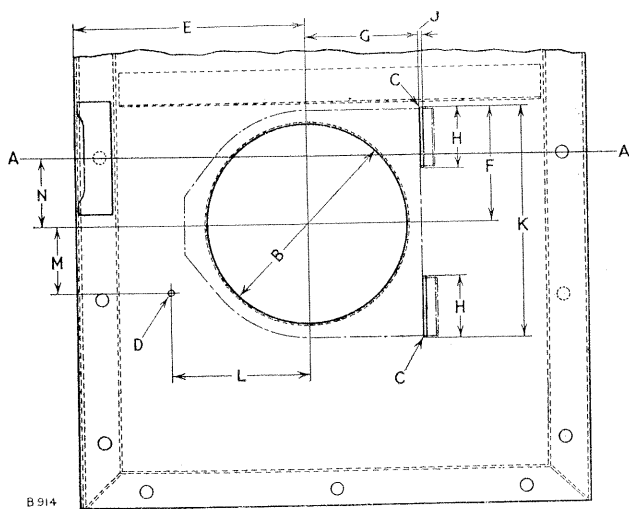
Cutting and drilling seat box centre inspection panel, early type
